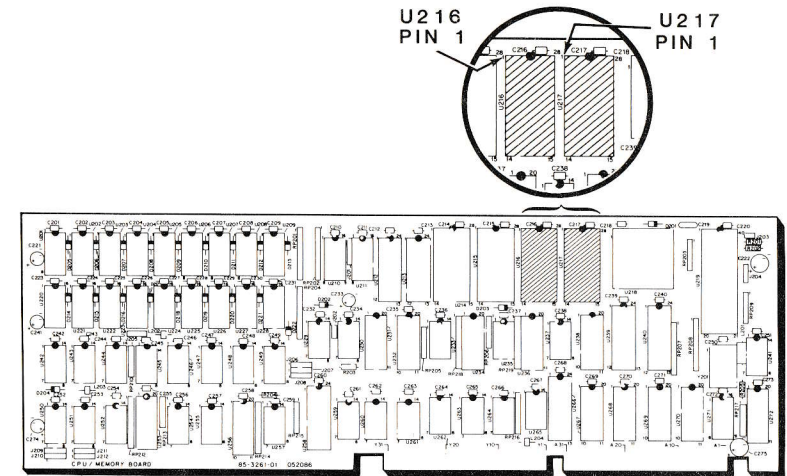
CPU/Memory Card (PCB Part No. 85-3261-XX)
